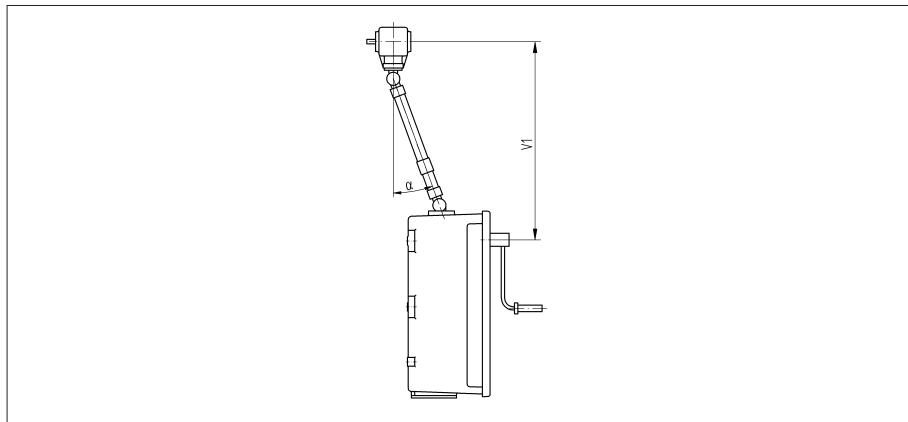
Drive shaft with cardan shaft, with insulator (= special model)
